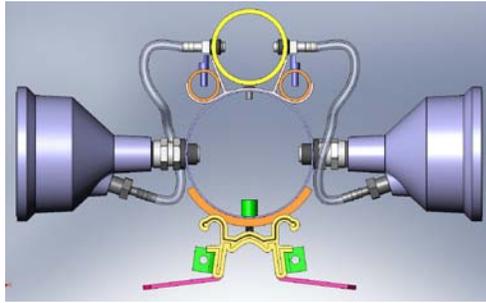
Cross-section of the foam generator assembly apparatus (ref: Sunarc of Canada)
